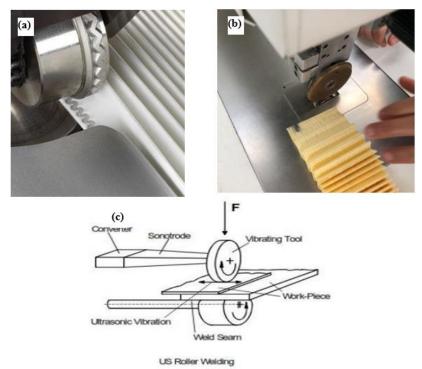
The method of joining with ultrasonic welding, a) Circular Horn (Lakshmikantha, 2011), b) Weld position filter paper, c) Schematic and application representation(Alleman, 2009).
